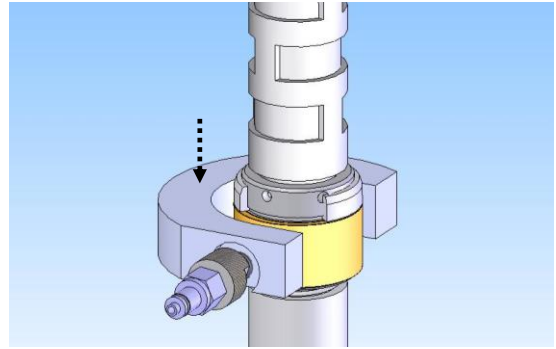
Slide sleeve and injection assembly toward the cable end to close the valve and re-insert the retaining ring.
